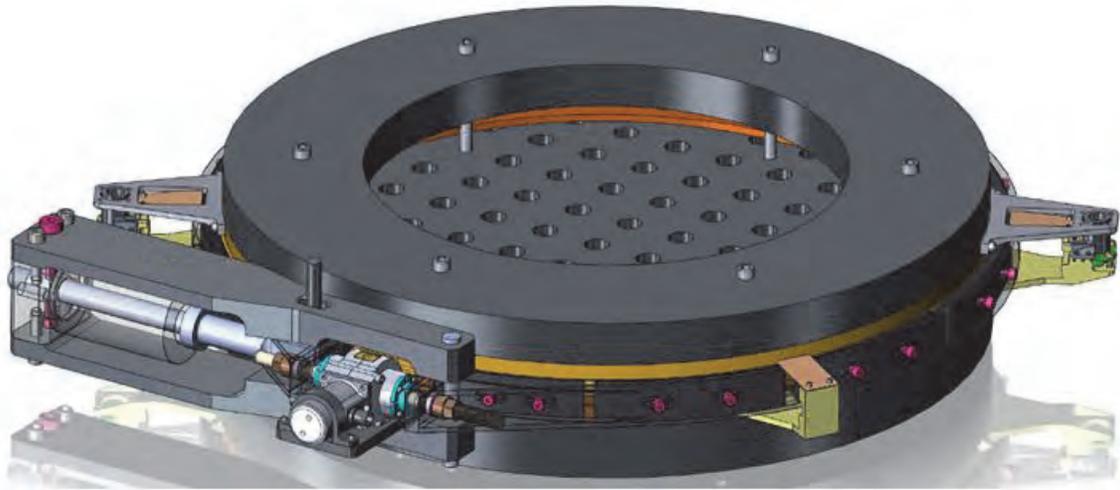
Hydraulic Loading Tool in-place, rings mated to fixture plates
